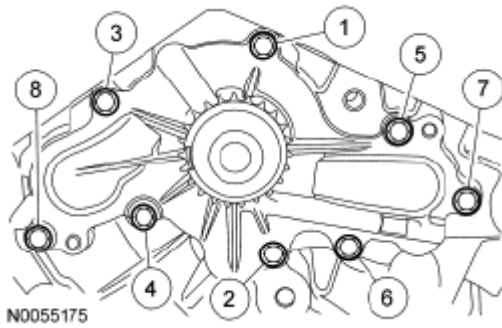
Tightening Sequence Of Coolant Pump Bolts
